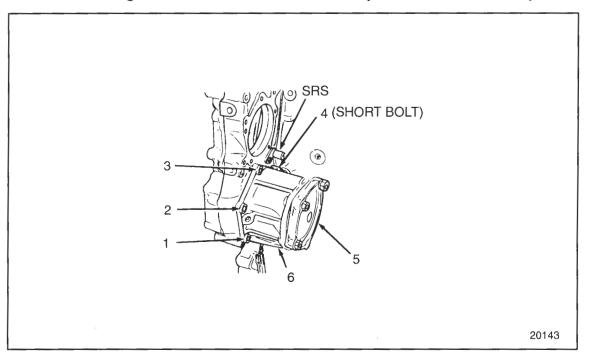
Gear Case Cover Bolt Arrangement (Left Rear)
